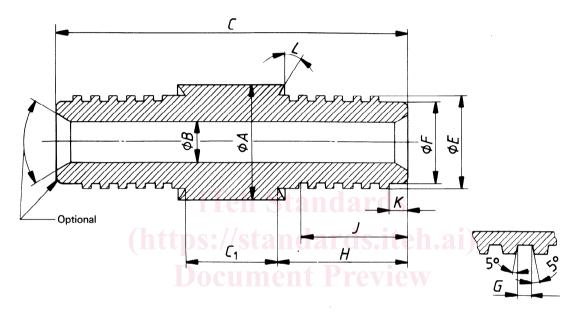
"W" design drill rod - Drill rod tube (see table 7)
